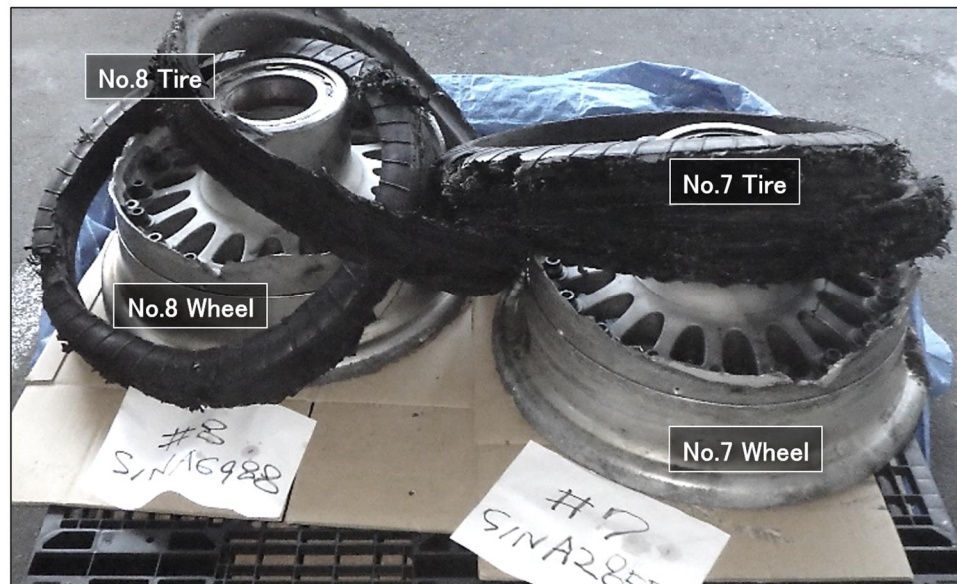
Damage to No.7 and No. 8 Wheel Assemblies
